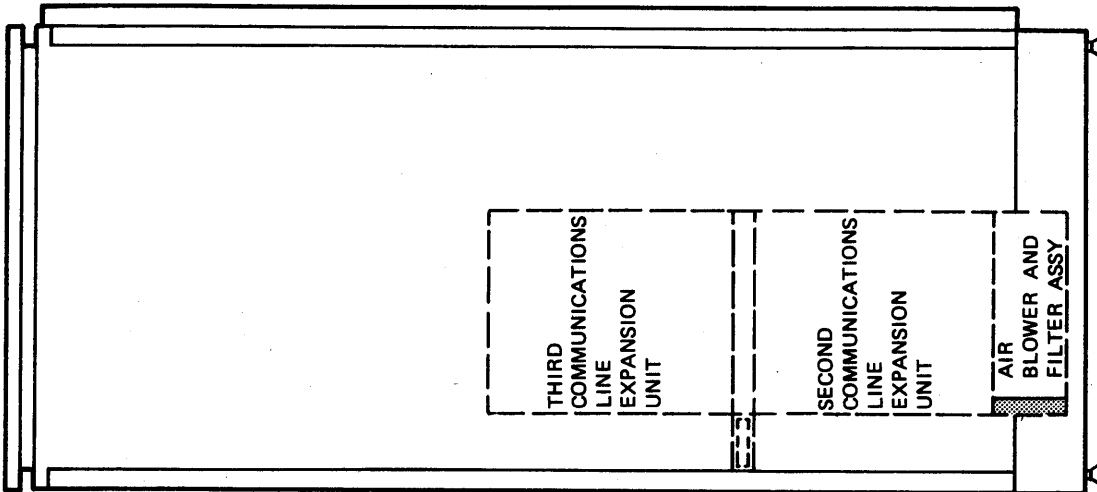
Component Location, Stand-Alone Cabinet, Side View
